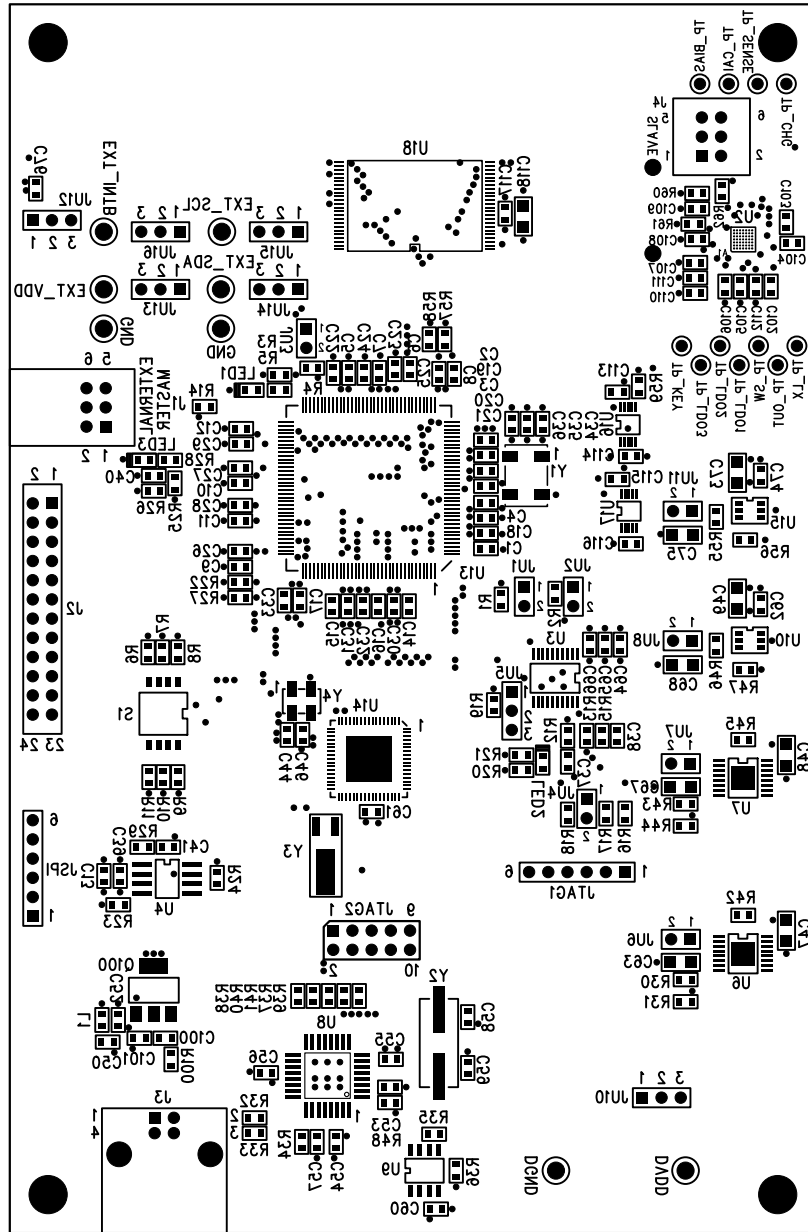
MAX44006 EV Kit Component Placement Guide—Bottom
